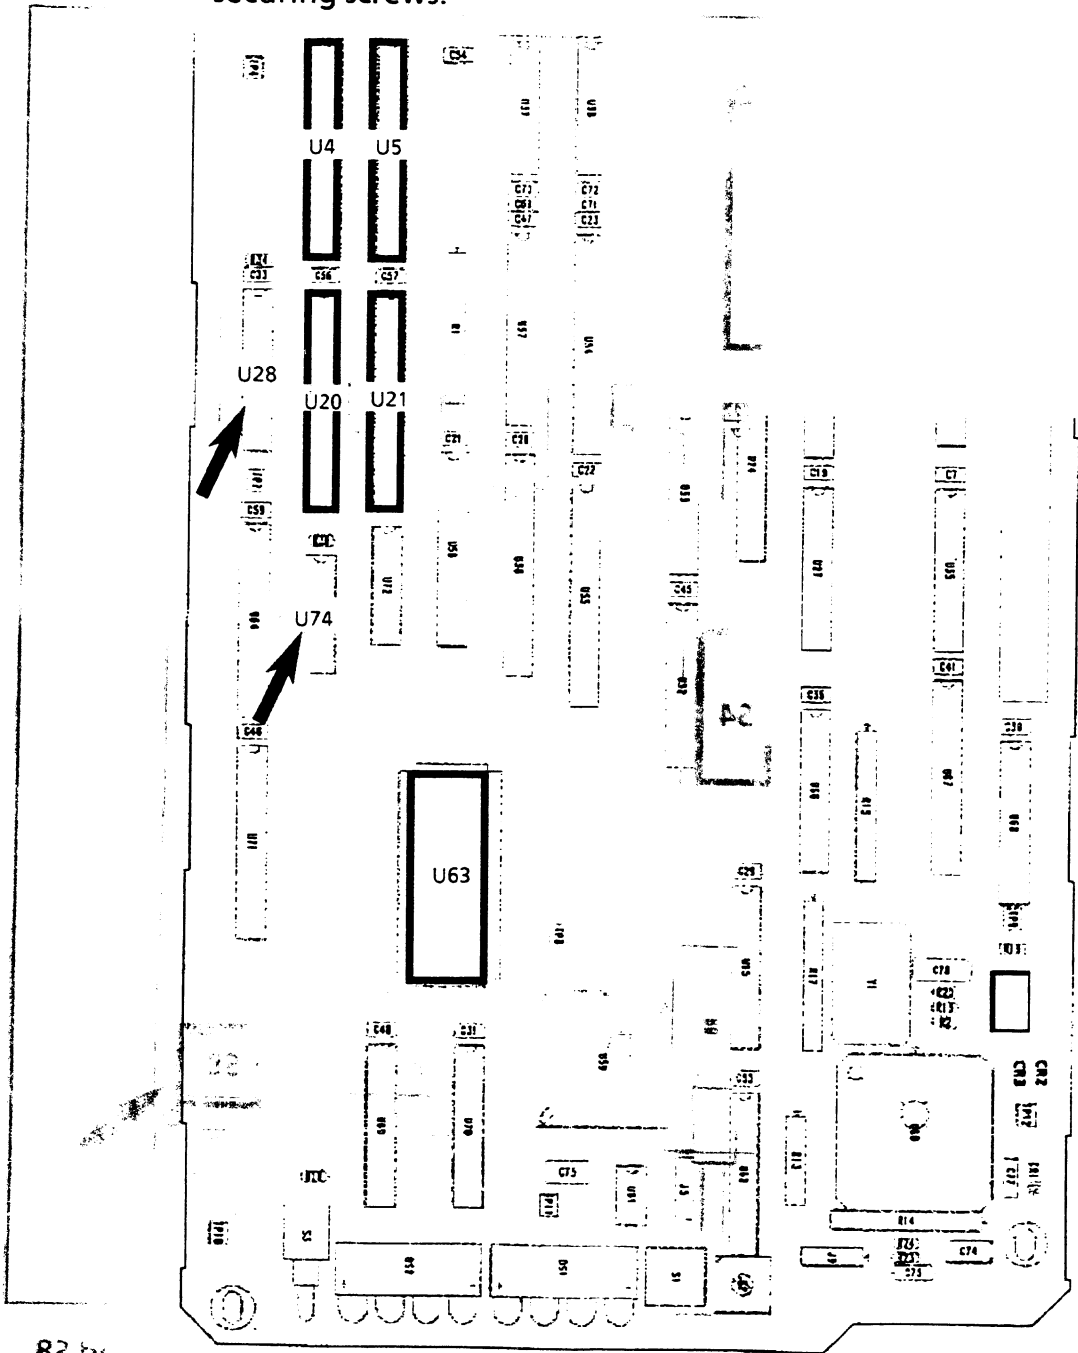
Partial Memory Controller circuit board (A3) showing location of U4, U5, U20, U21 and U63.
